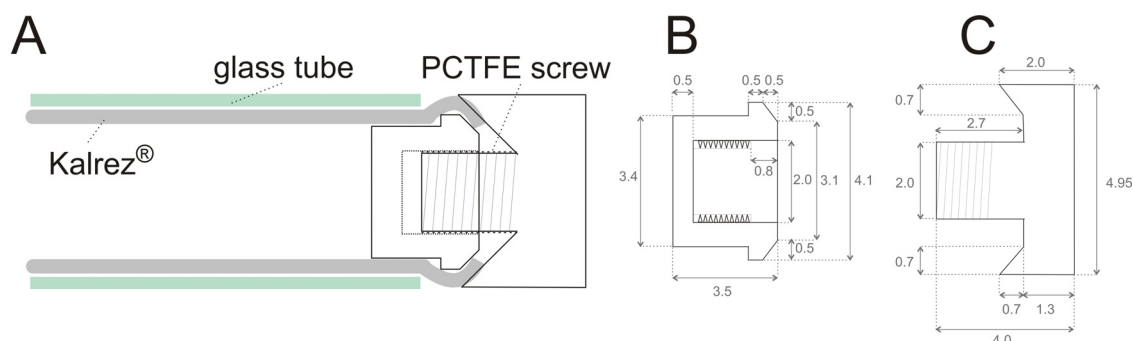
Screw clamp for fixation of the flexible Kalrez[®] 8002UP tube at the bottom of the stretching device. The principle of holding the rubber tube tightly is shown in (A) and dimensions (in mm) of the two parts of the specially designed PCTFE screw are given in (B) and (C).
